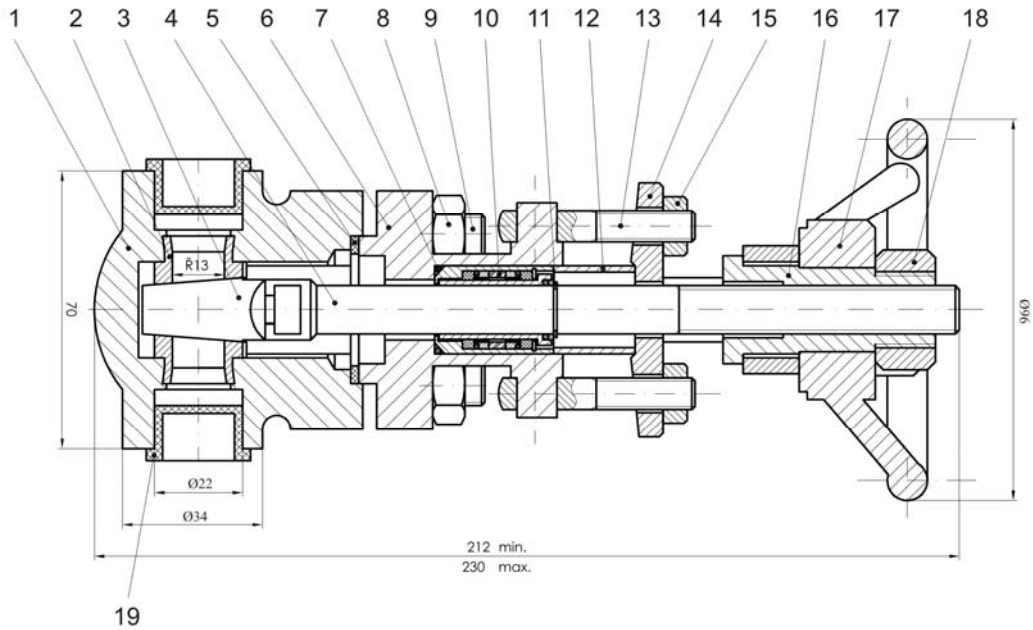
Sketch of isolating valve equipped by magnetic fluid seal; Components: 1 – Body; 2 – Reducer; 3 – Conical disc; 4 – Valve spindle; 5 – Gasket; 6 – Valve guide; 7 – "O" ring; 8 – Screw Nut M10; 9 – Joint pin; 10 – Magnetic liquid seal; 11 – Elastomeric ring; 12 – Sealing gland; 13 – Screw hoop; 14 – Flange; 15 – Screw Nut M8; 16 – Threaded sleeve; 17 – Handwheel; 18 – Screw Nut M18x1.5; 19 – Protection cap;
